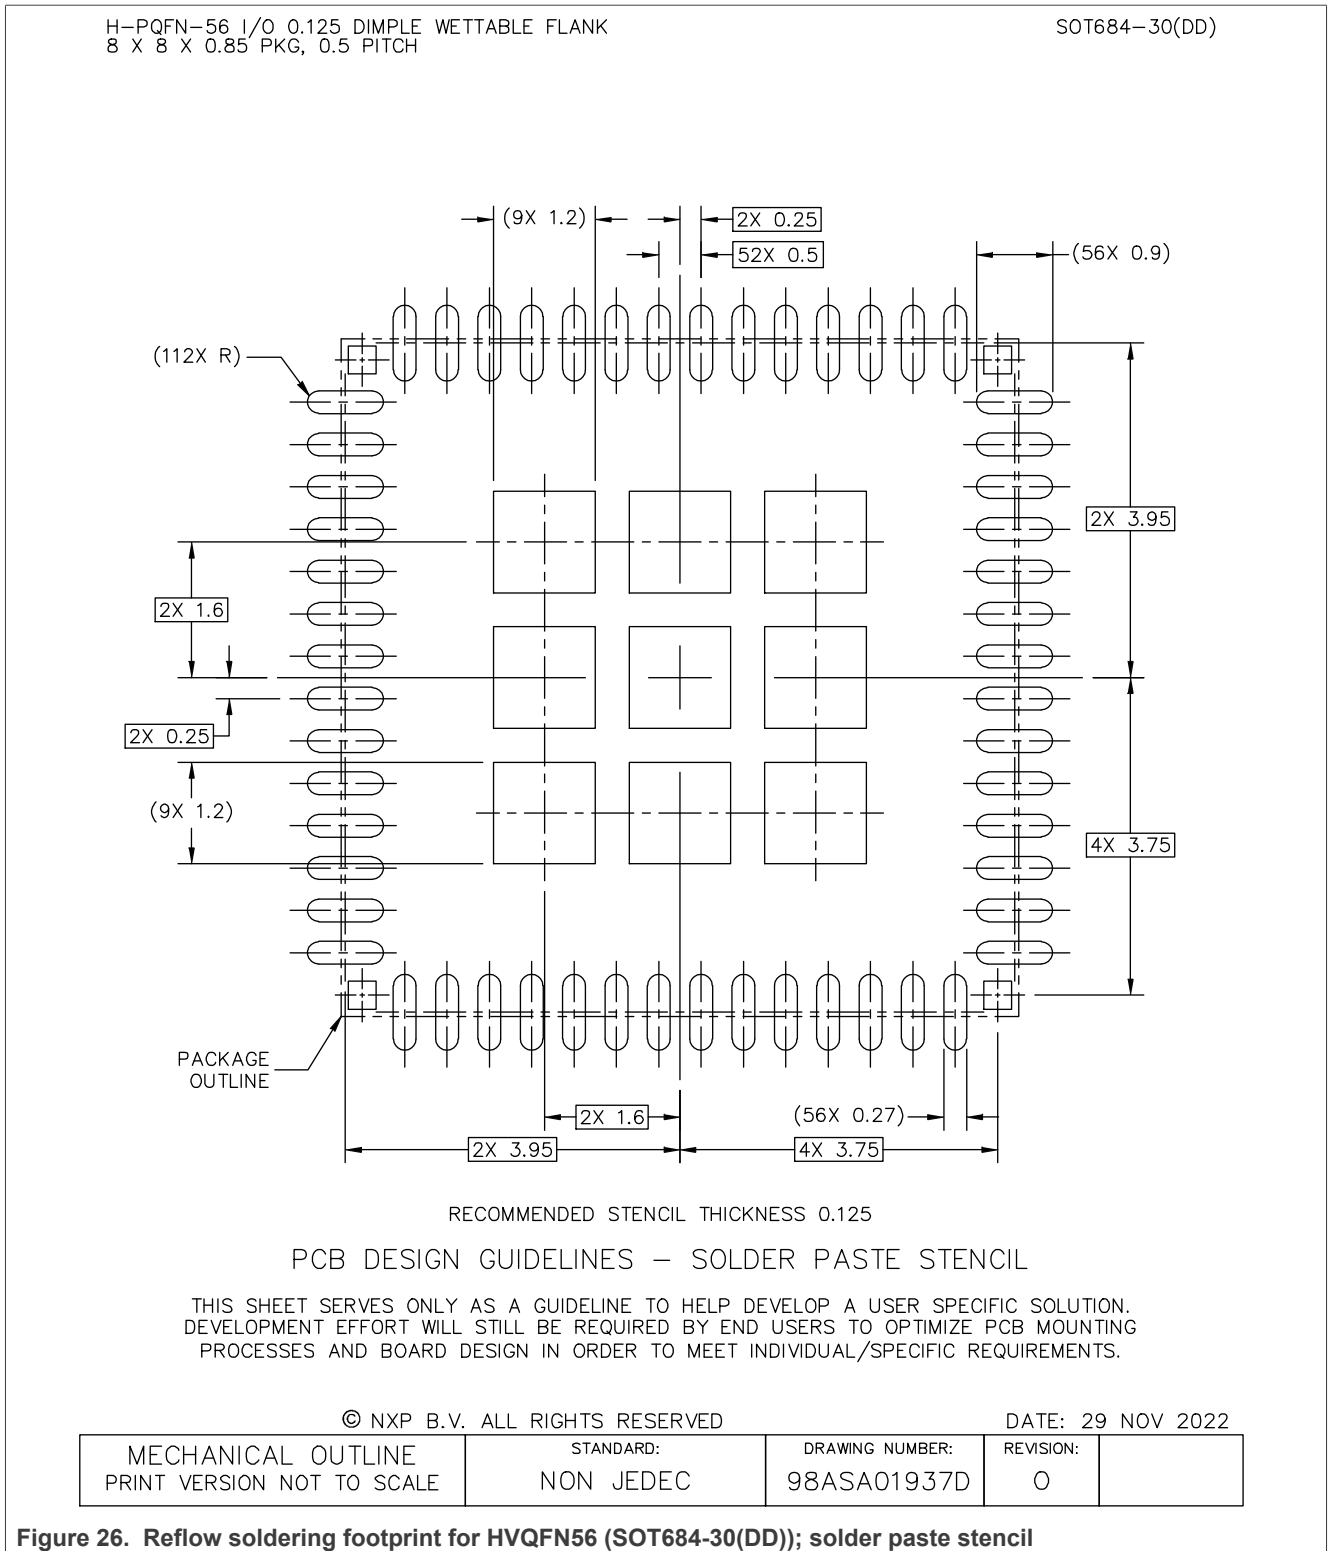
Reflow soldering footprint for HVQFN56 (SOT684-30(DD)); solder paste stencil
